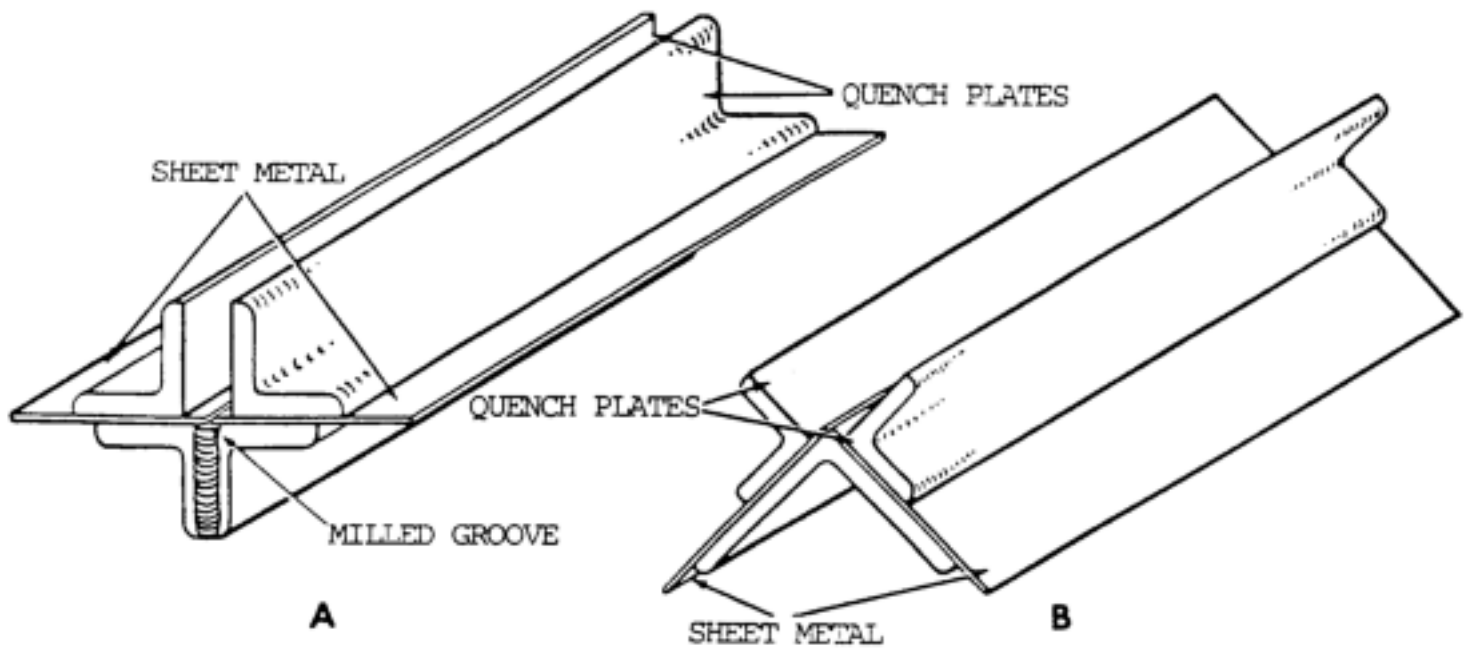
Quench plates used in the welding of sheet metal.
